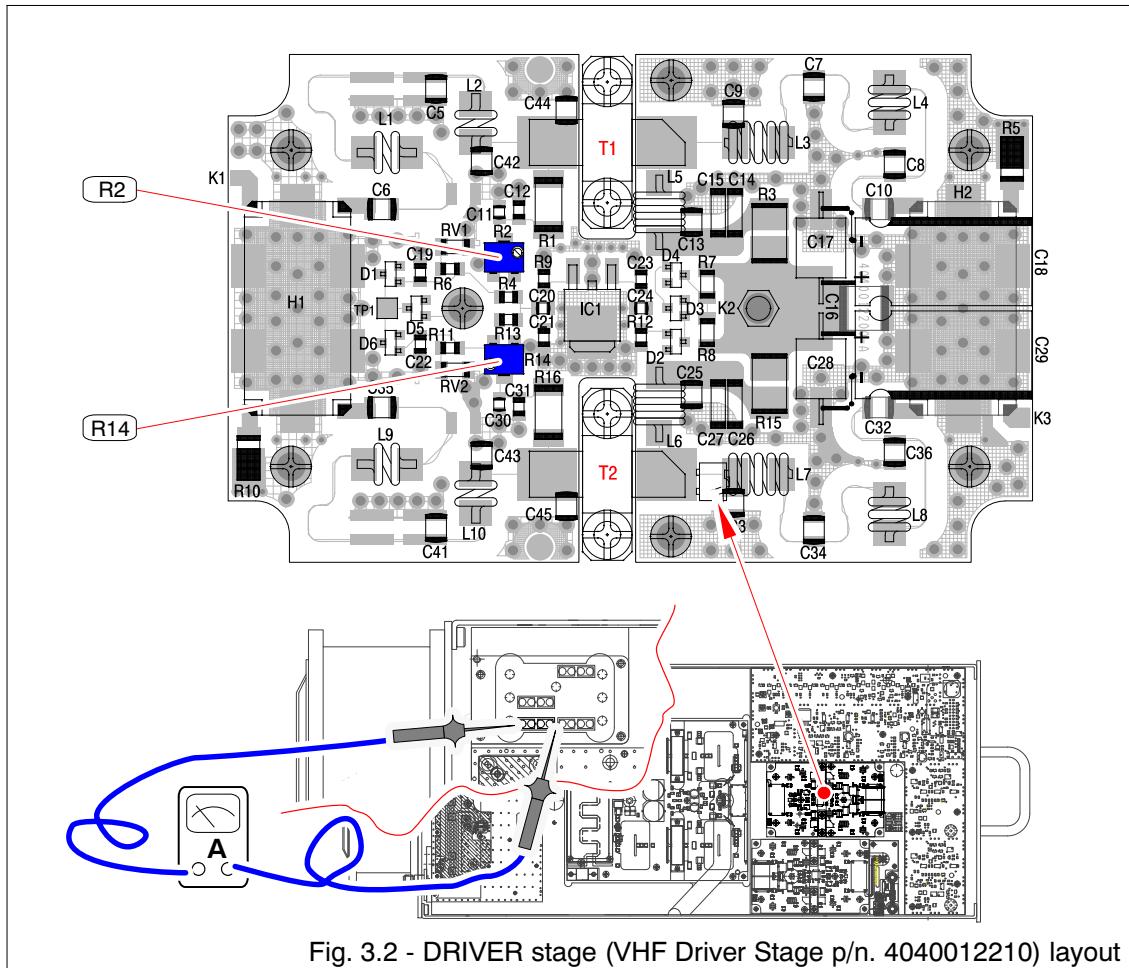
DRIVER stage (VHF Driver Stage p/n. 4040012210) layout
